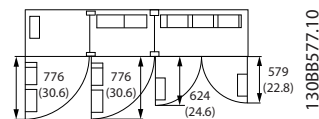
Space in front of IP21/IP54 enclosure type, frame size F13
